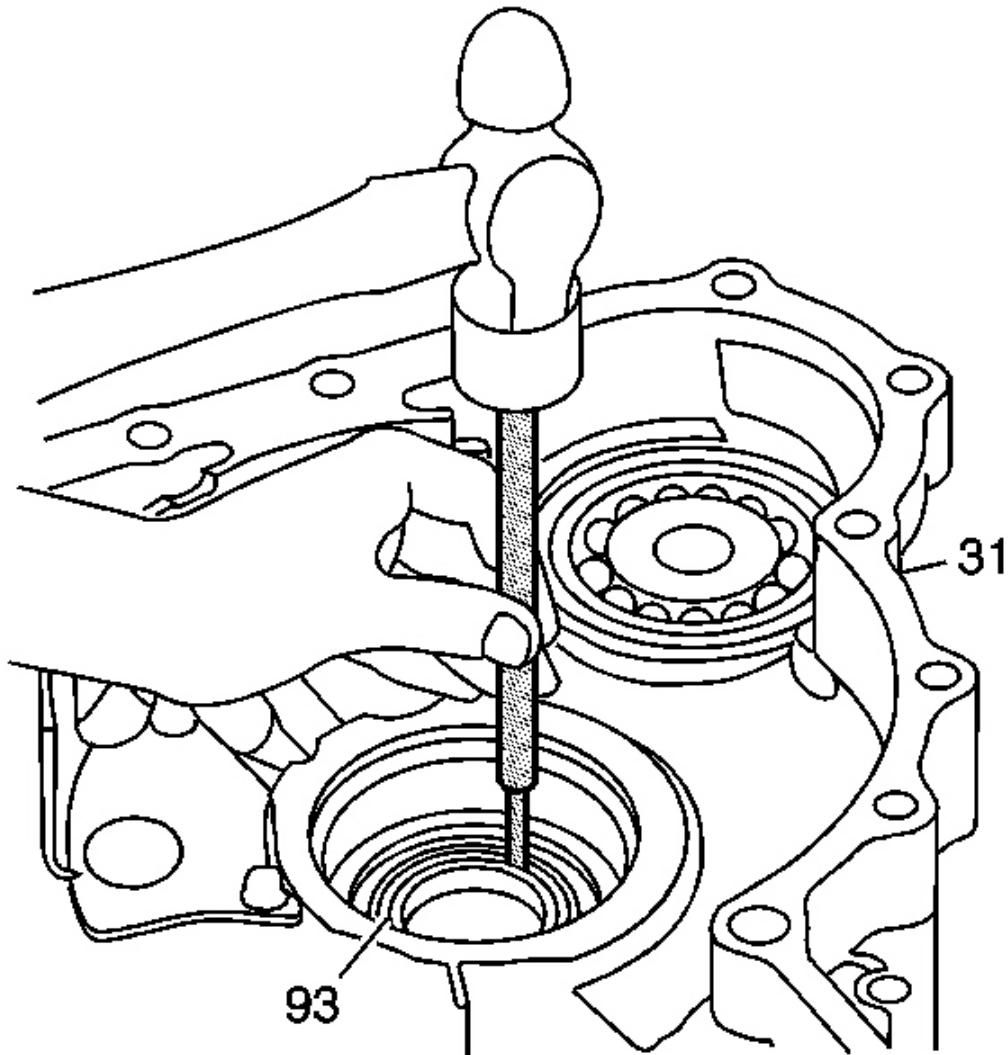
Removing Front Wheel Drive Shaft Fluid Seal Using A Hammer & Punch
